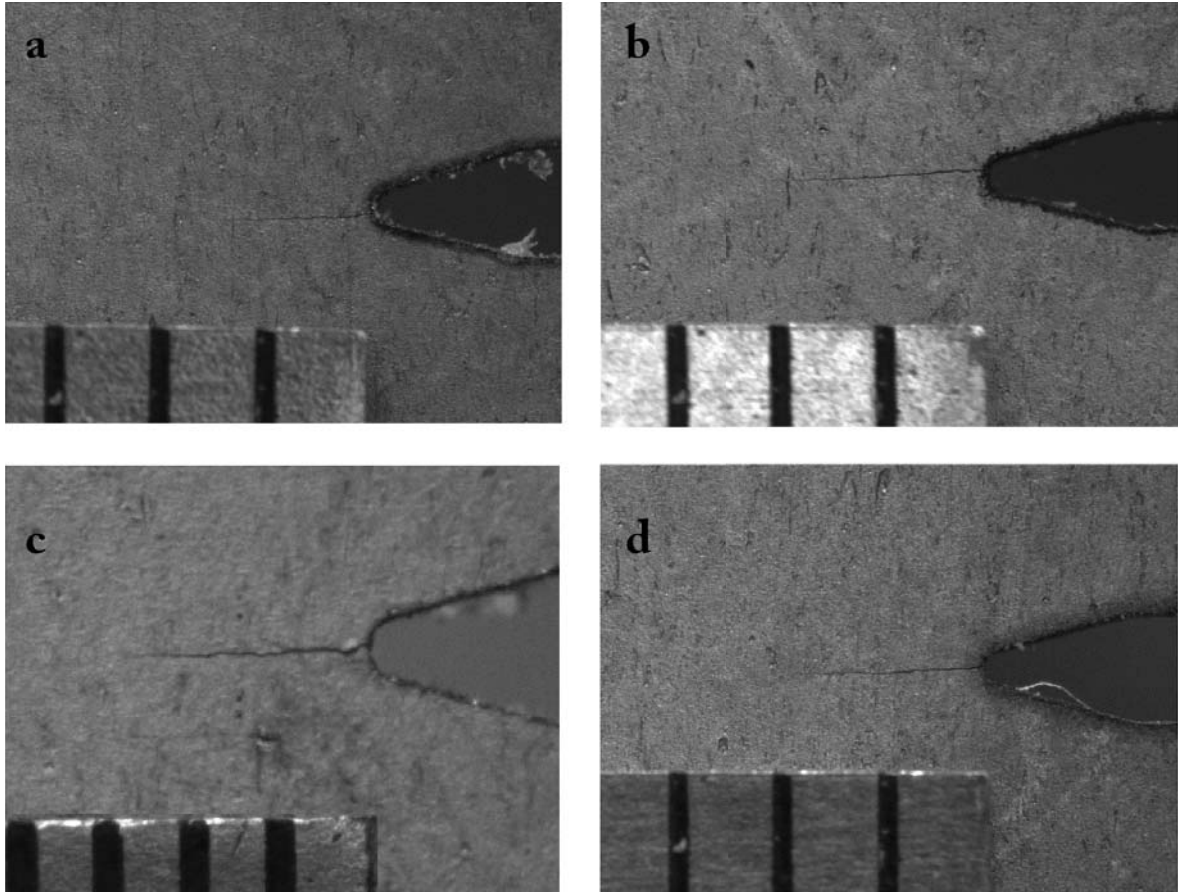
Optical images of pre-cracks on NiTi CT specimens used in  $K_C$  testing; (a) specimen 1, (b) specimen 2, (c) specimen 3, and (d) specimen 4.
